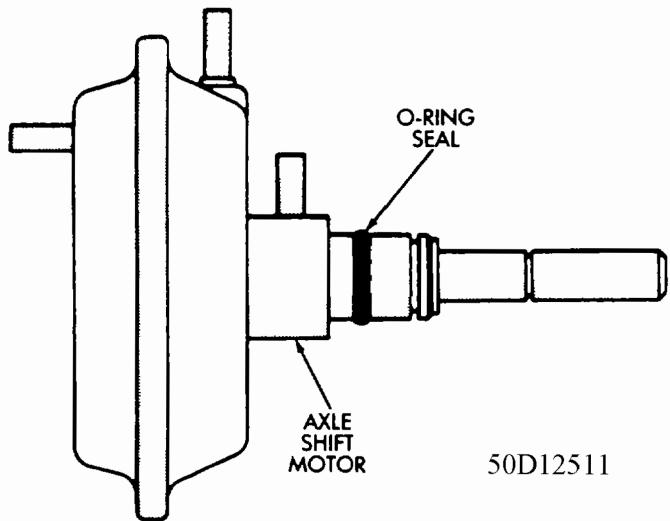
Axle Vacuum Shift Motor Shaft O-Ring Seal
